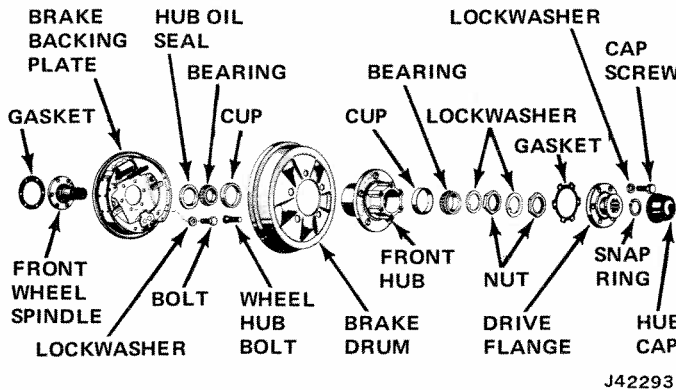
Front Wheel Attaching Parts, CJ Models
